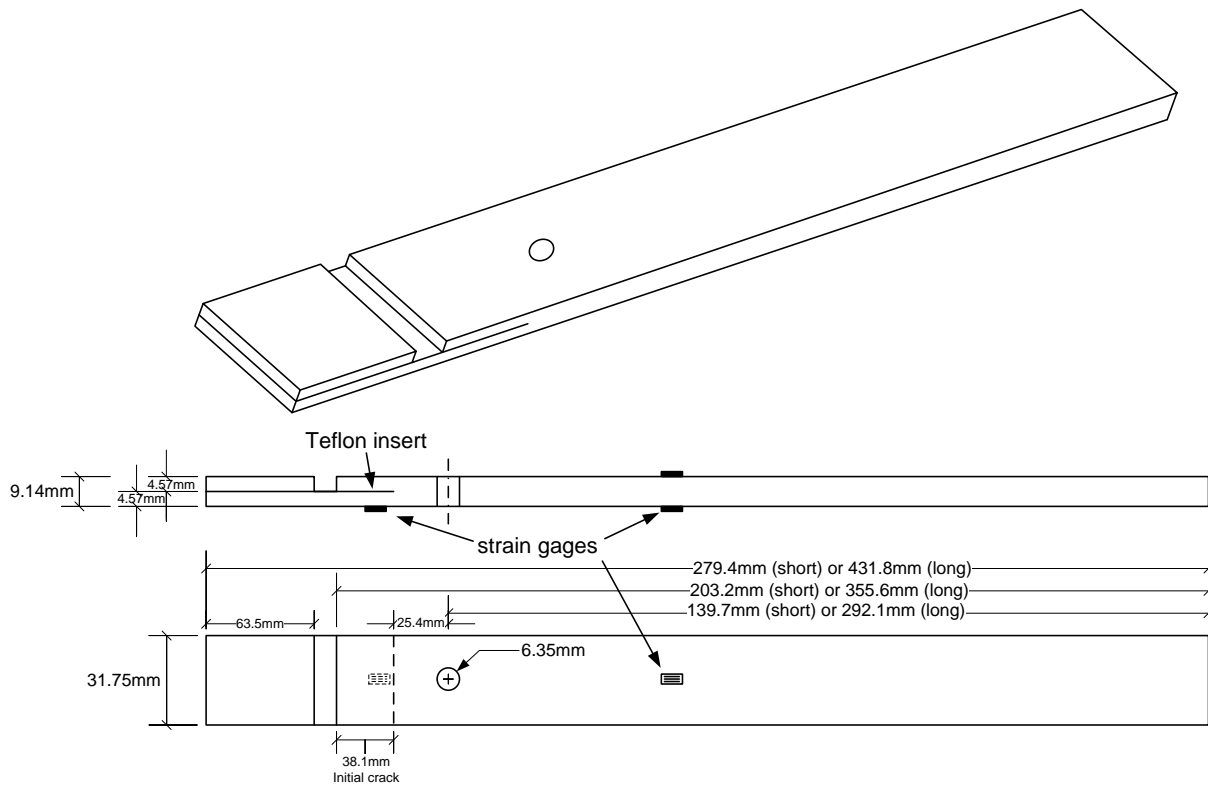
Drawing of the tension crack arrest test specimen (not to scale) [3]
